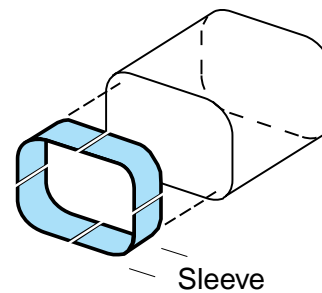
Sleeve Created to Control Weld
